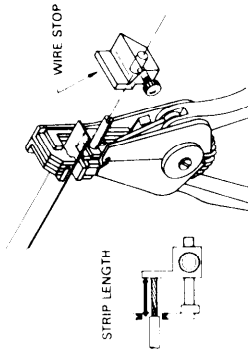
MECHANICAL STRIPPER DEPTH ADJUSTMENT
